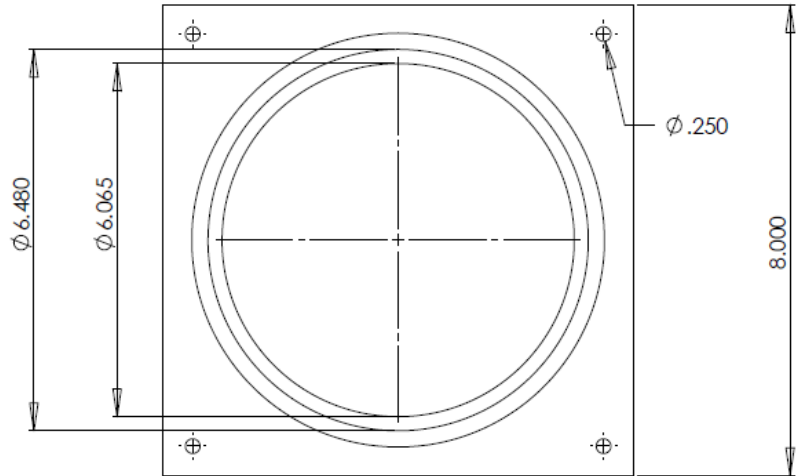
Drawing of the ring component showing the O-ring groove, hole, and four holes for the bolts.
